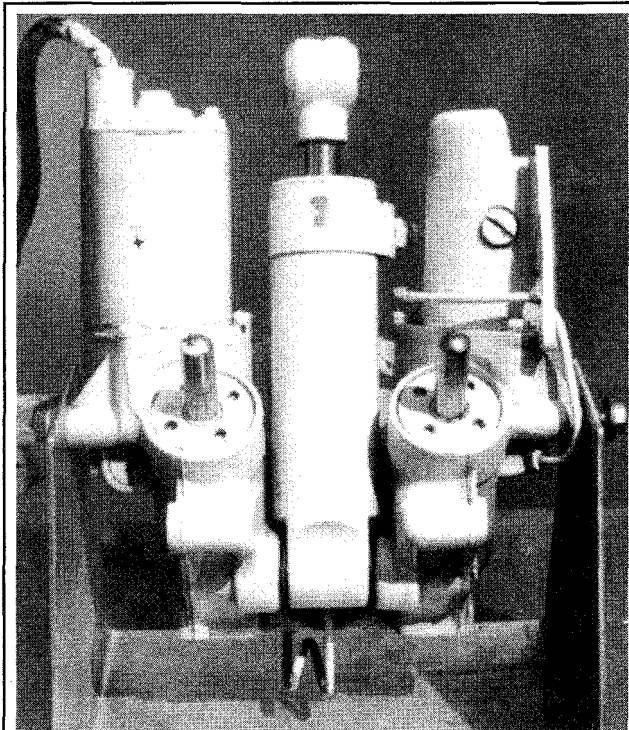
Trim and tilt assembly mounted in the illustrated holding bracket
